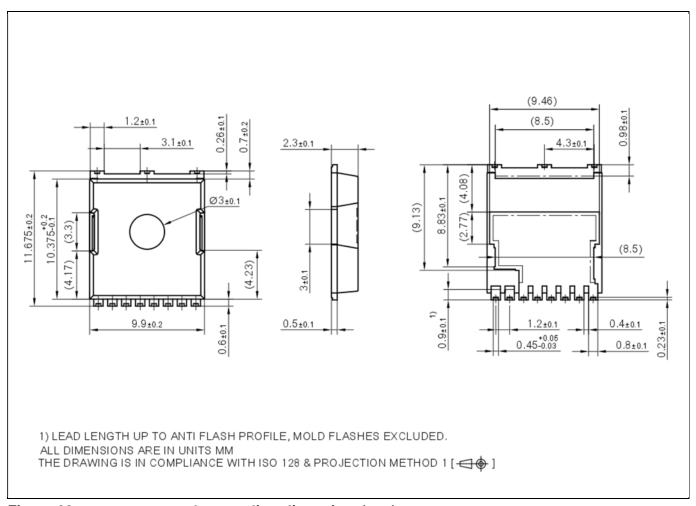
PG-HSOF-8-3 Package Outline, dimensions (mm)
